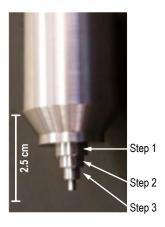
Close-up of the FSW tool showing the shoulder (step 1) and backing anvil (step 3).
